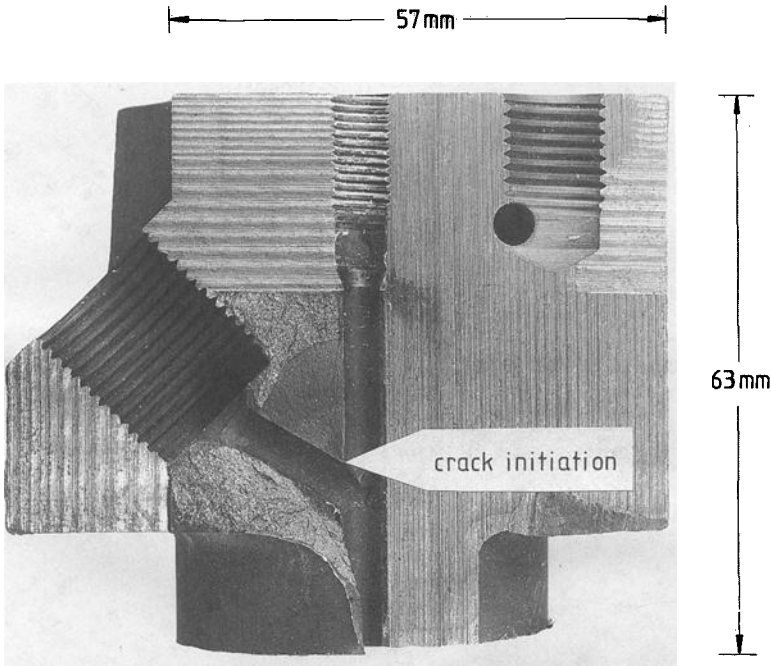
Fatigue crack at a cross bore of a fuel injection pump.
